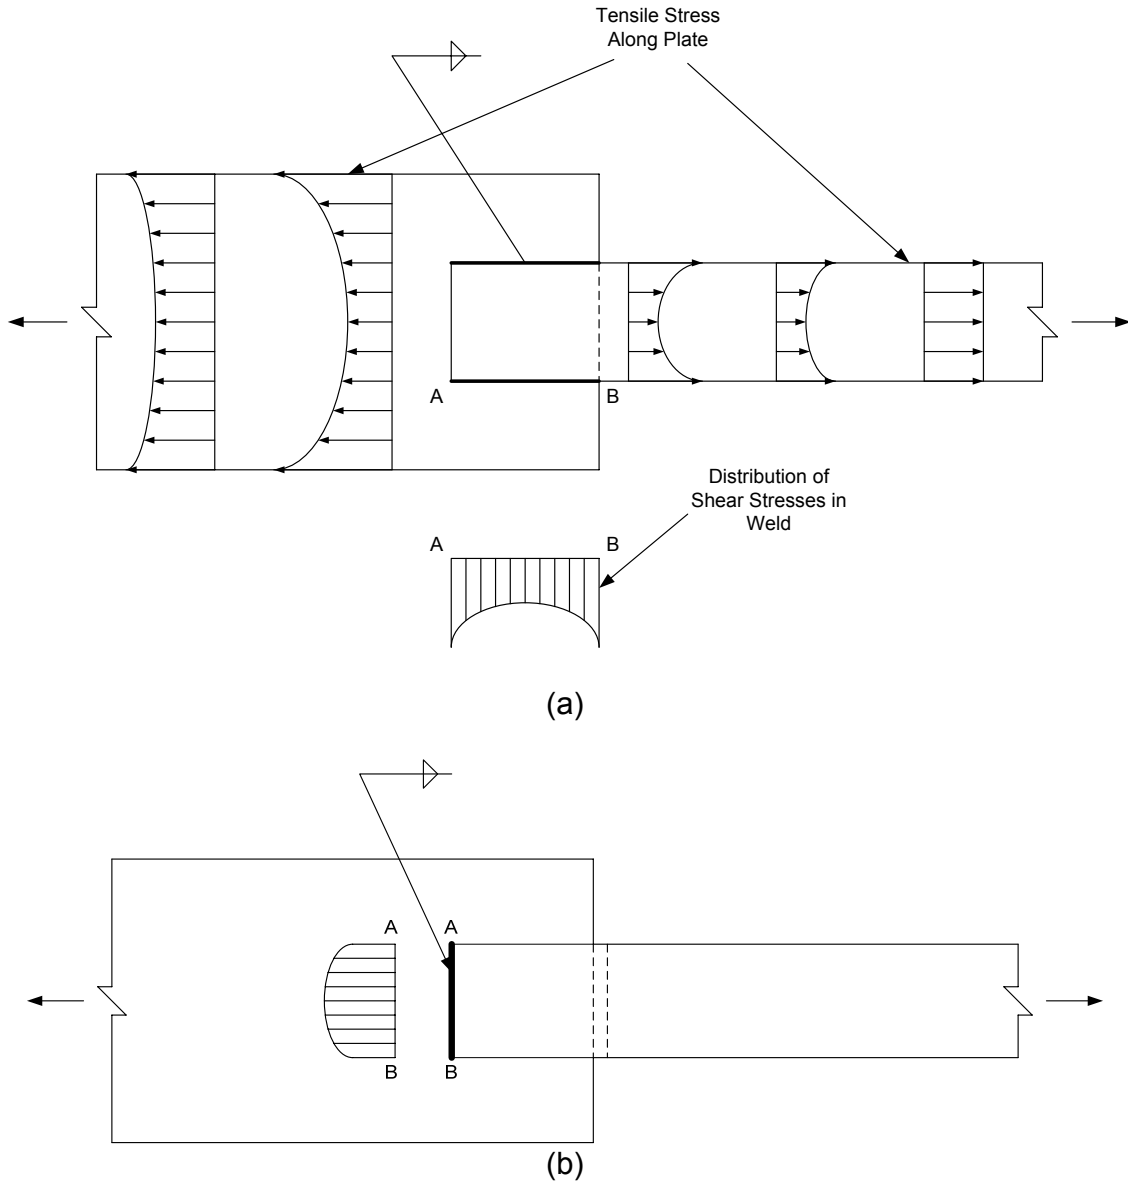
Typical Fillet Weld Shear Stress Distributions in a Lap Joint
